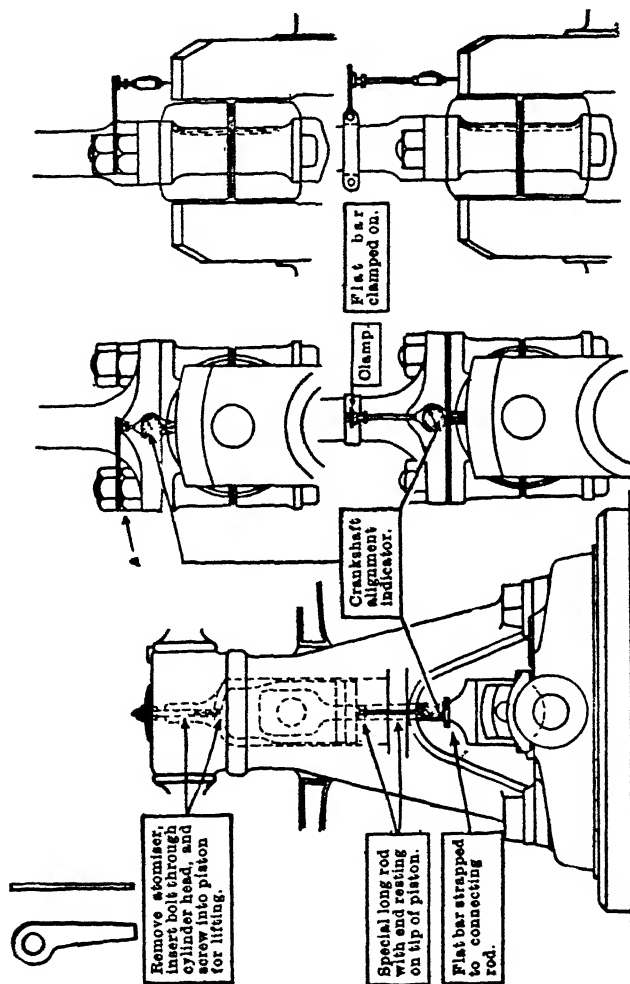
METHOD OF TESTING BEARING CLEARANCES WITH DIAL INDICATOR (Ruston & Hornsby, Ltd.)
